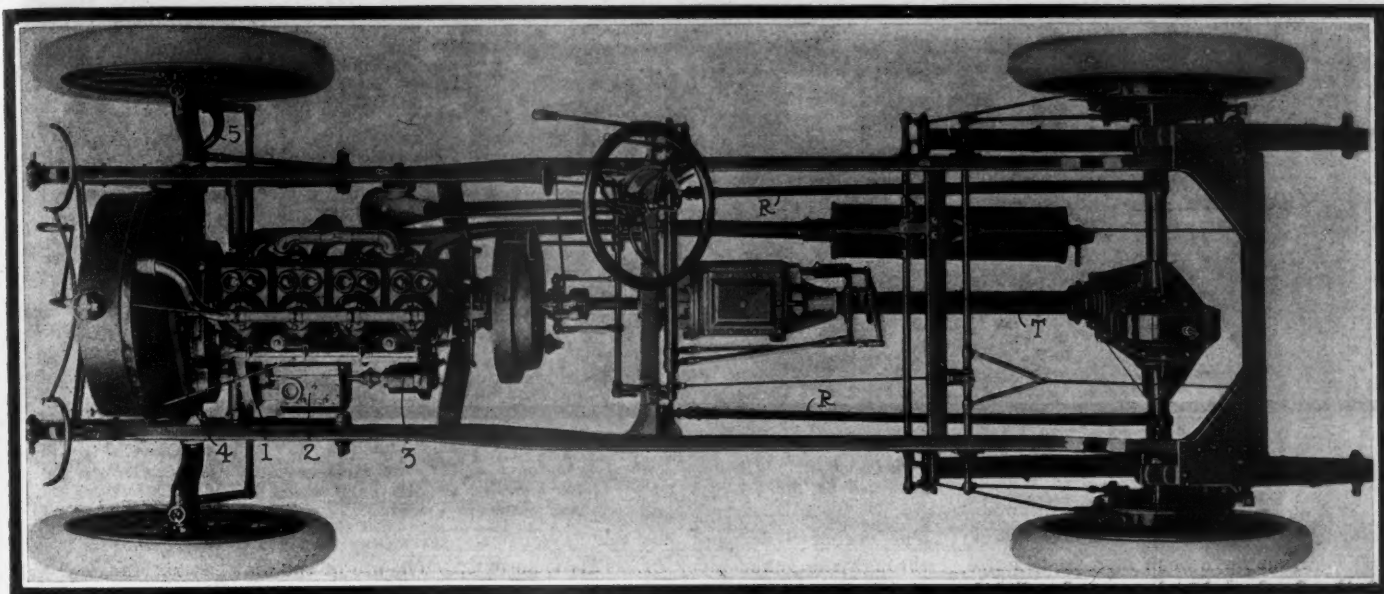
RAMBLER CHASSIS, 4 1/2-INCH SQUARE MOTOR, SHOWING IMPROVEMENTS
